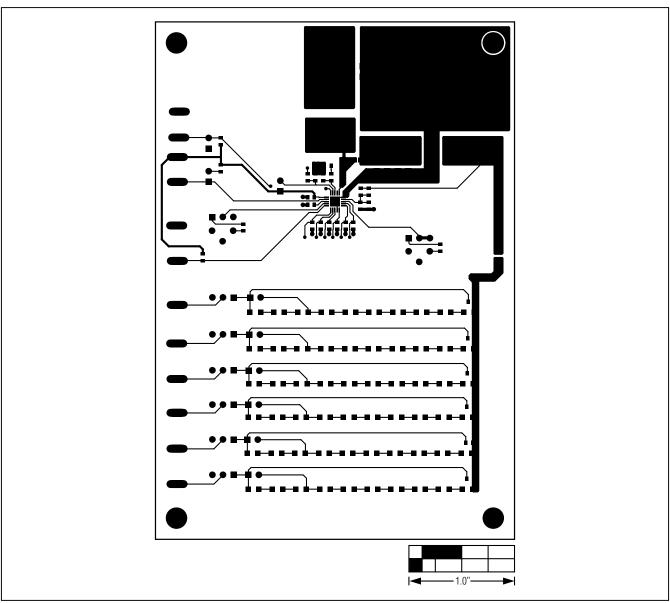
MAX17127 EV Kit PCB Layout—Component Side
